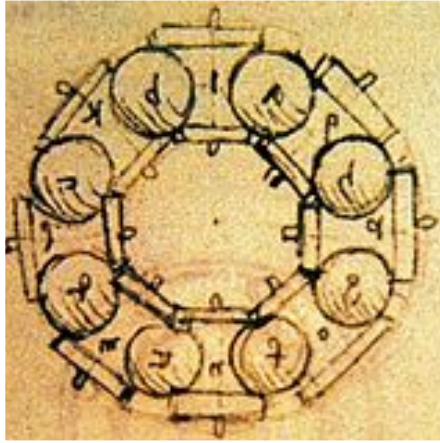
The drawings of Leonardo de Vinci of the first bearing [1].
